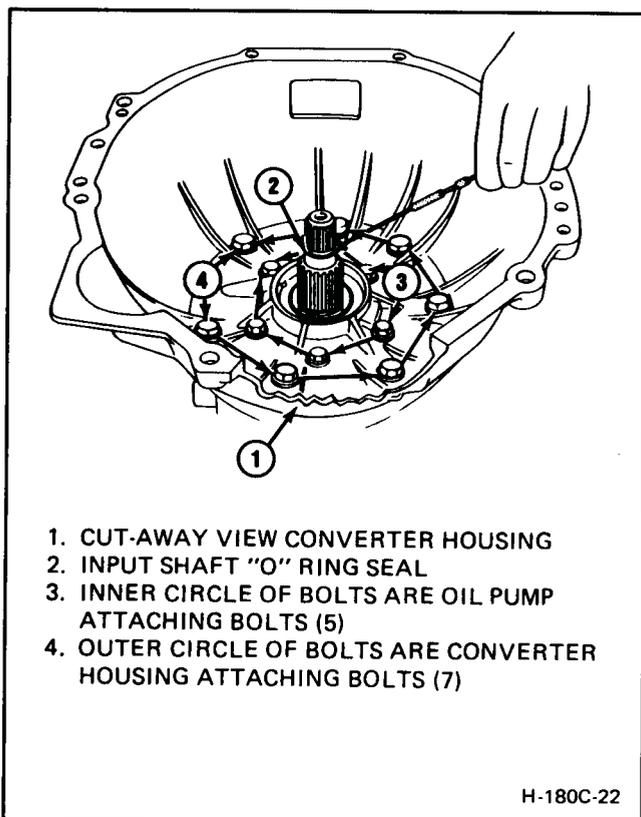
C-30 Converter Housing Attaching Bolts and "O" Ring Seal
